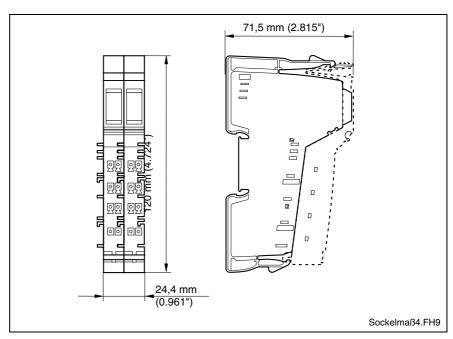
Dimensions of the electronic sockets (4-slot housing)
